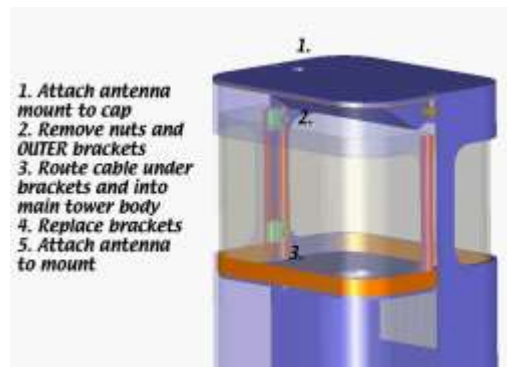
An example of mounting the remote-mounting antenna onto the cap of an ETP-MT/R-OP-PCS tower.
